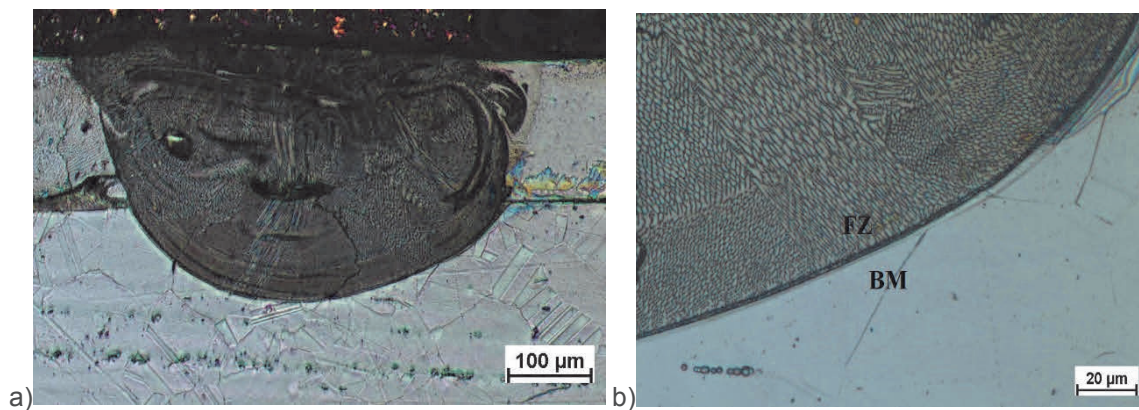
Microphotography of weld structure; welding amperage 80%
